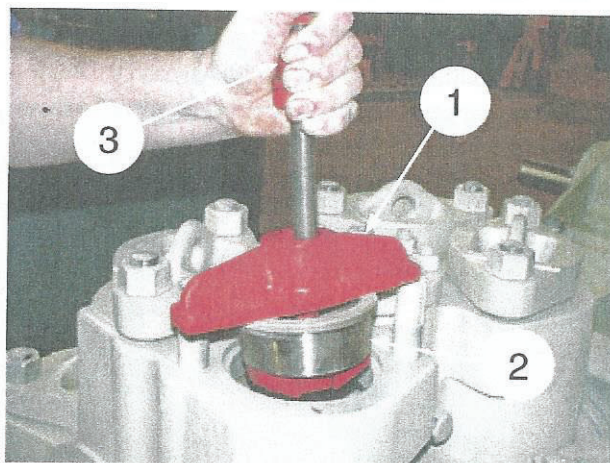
Mud Pump Valve Seat Removal; After the puller nut [3] has been tightened sufficiently, the valve seat [2] will release and then the puller assembly [1] and the valve seat [2] can be lifted out as shown.
